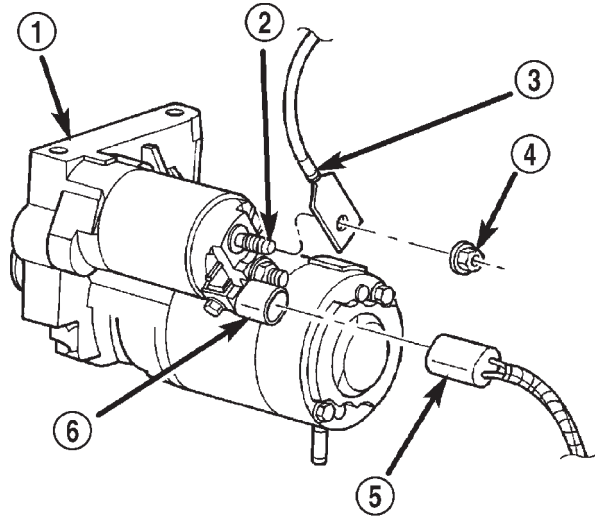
Starter Motor Remove/Install - 2.5L Engine
